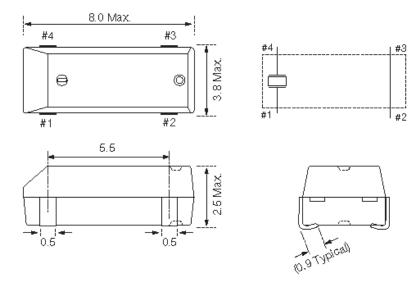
Top, Side and End Views Pad 2 & 3 No Connects
